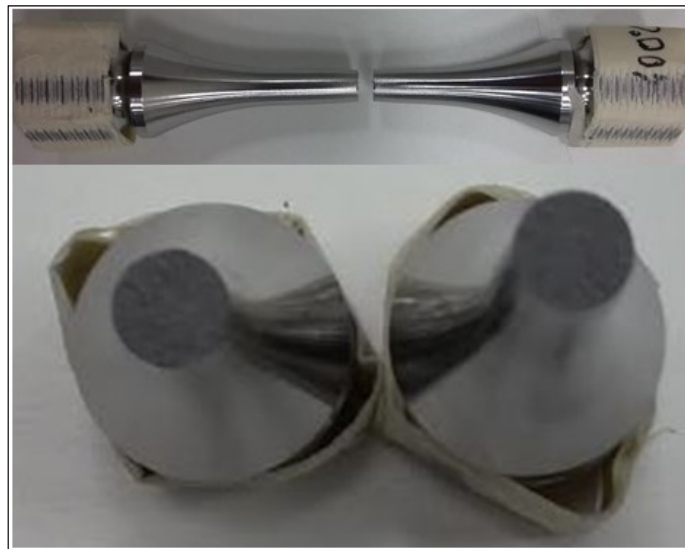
Brittle fracture surface for tensile tested specimen (SP-13)
